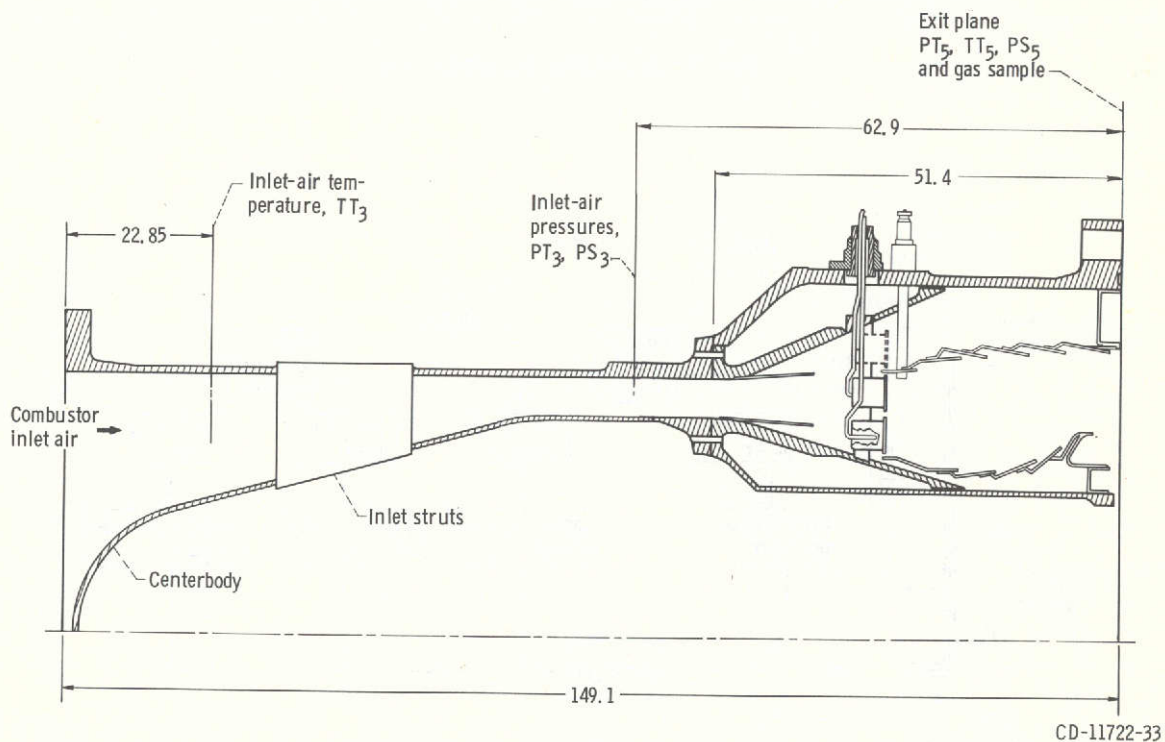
Combustor housing and test section showing axial instrumentation planes. (Dimensions are in centimeters.)
